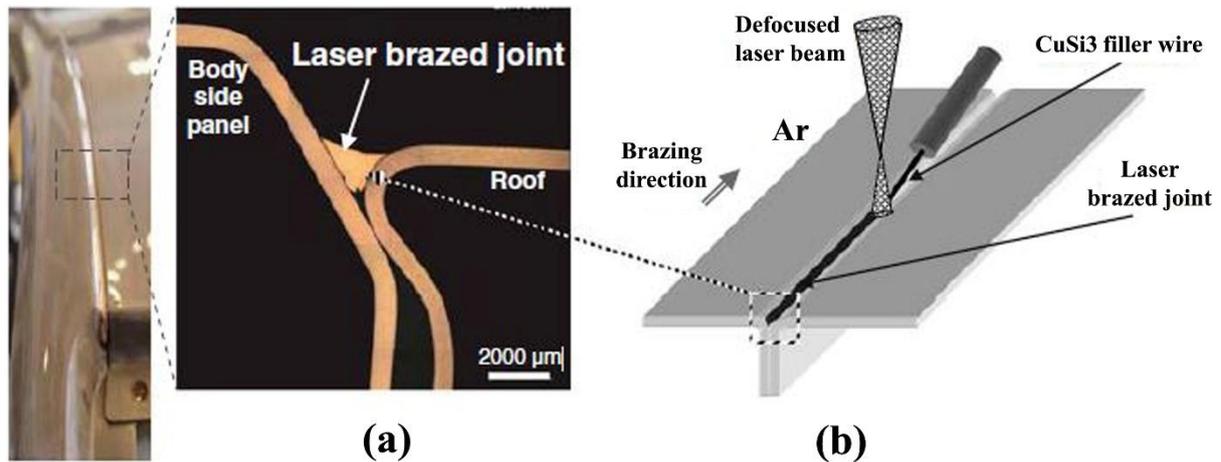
(a) Joints cross section view of the laser brazed welds of roof/body side panel, (b) A schematic illustrating the principle of laser brazing [33].
